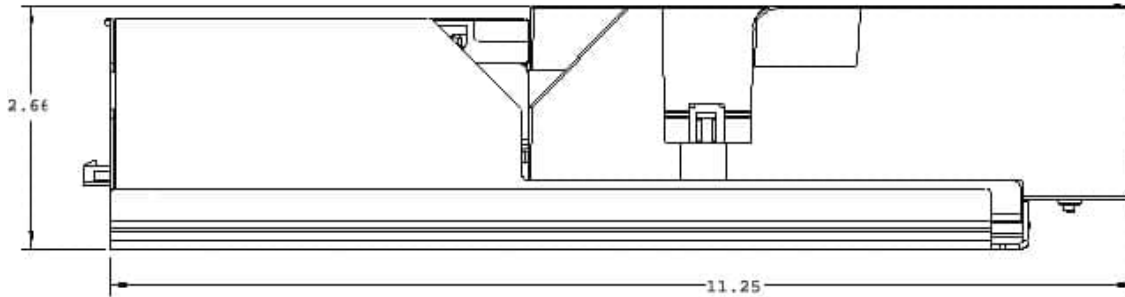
Epic Edge® and Epic Edge+® Printer: Dimensions
